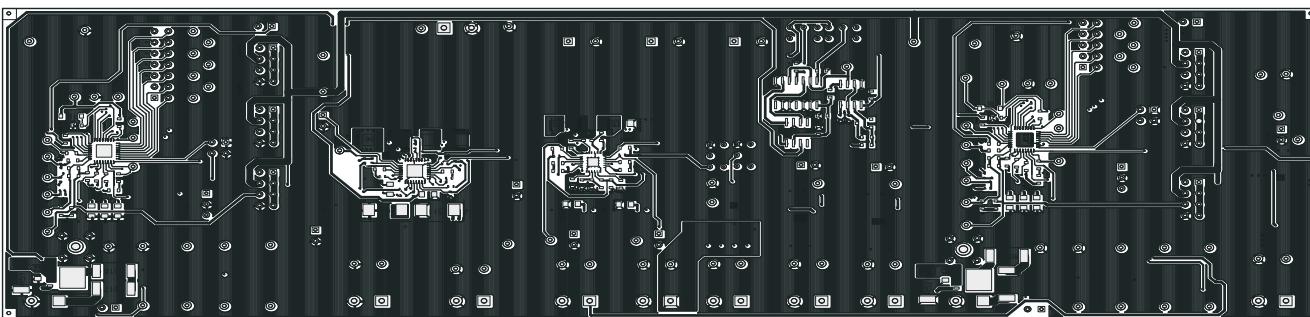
TPS59610EVM-634 Bottom Layer, Bottom View
